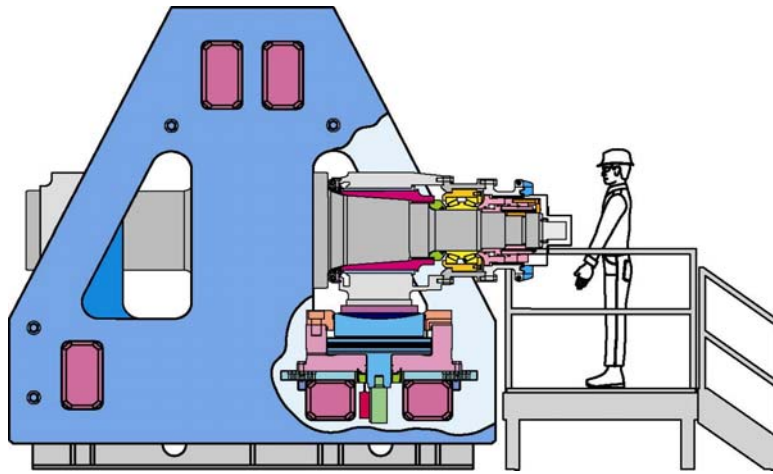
Schematic of MORGOIL Bearing Test Stand built by Morgan Construction Company
